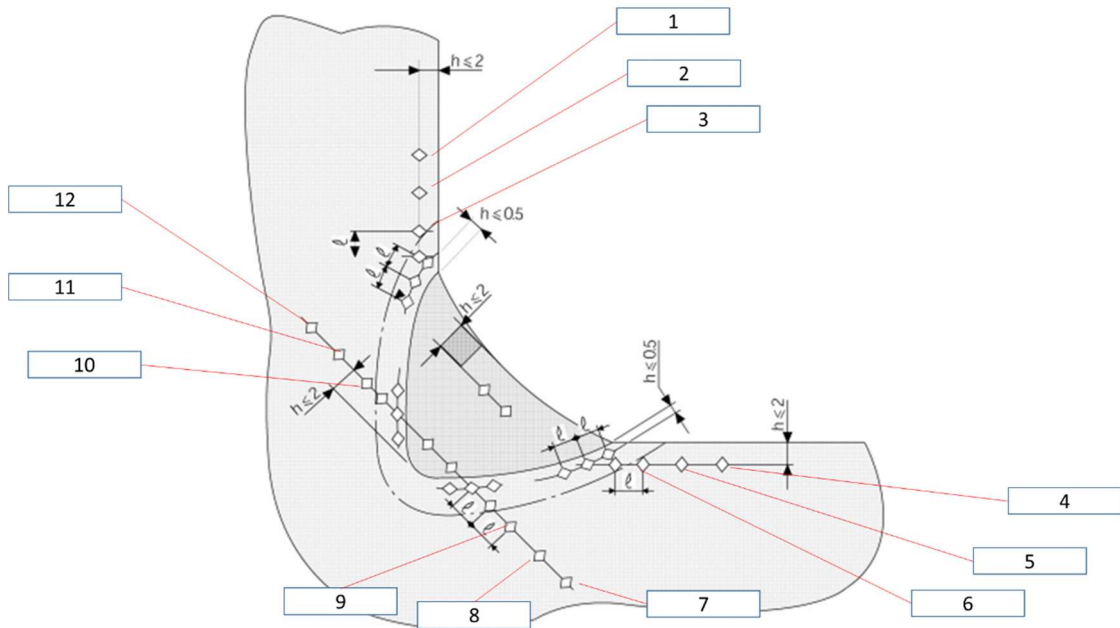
IACS W28 Fillet Weld [3.10]
